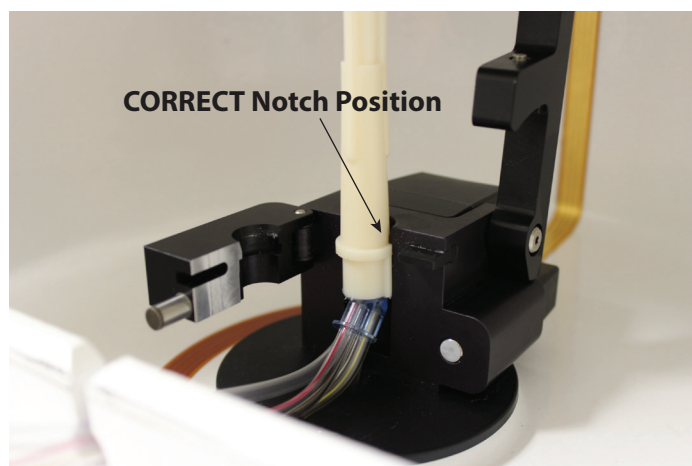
Keyed Drive Tube and Clamp Assembly
